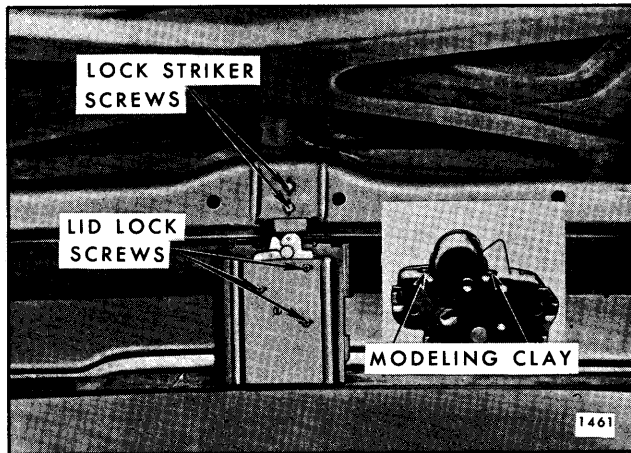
Rear Compartment Lid Lock Assembly - Mounted in Rear End Panel
